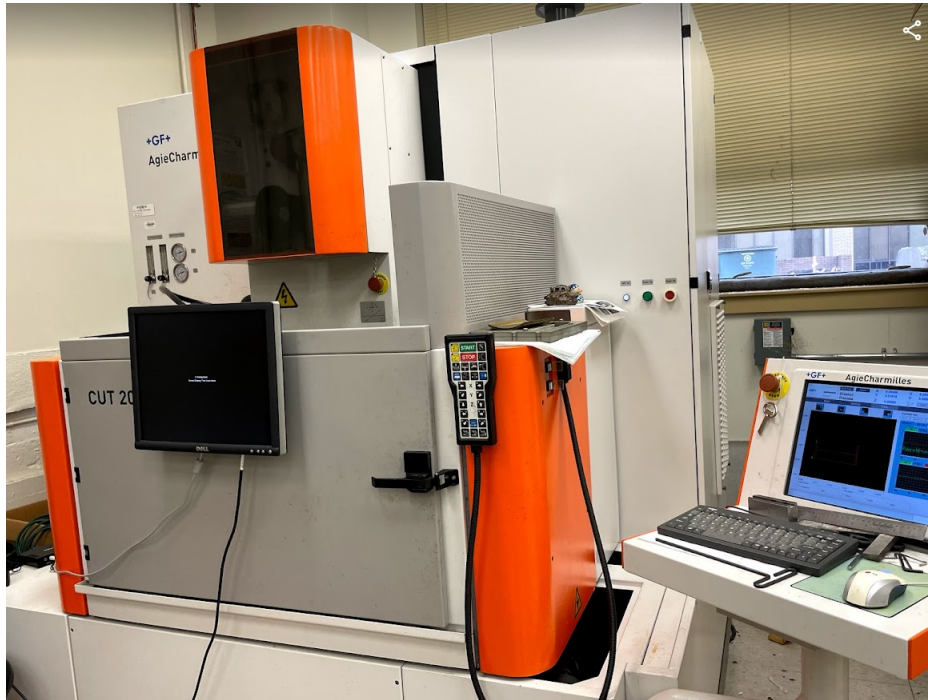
Machine used for EDM cutting of sheared-edge specimens.
